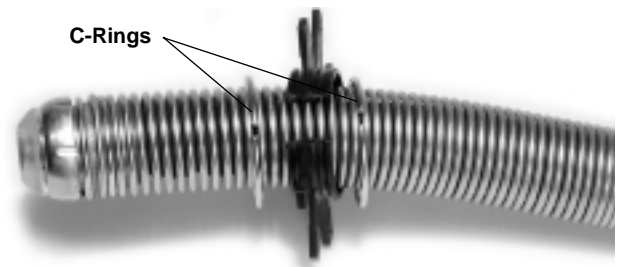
Guide and C-Rings Positioned On Spring Assembly.
